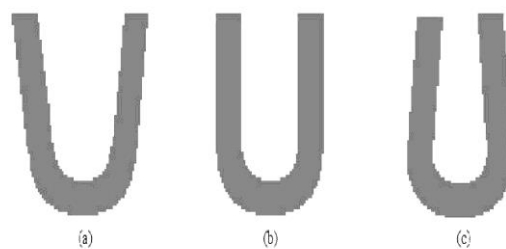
Example of camber (a) Casting without camber, (b) Actual casting, (c) Pattern with camber allowance
